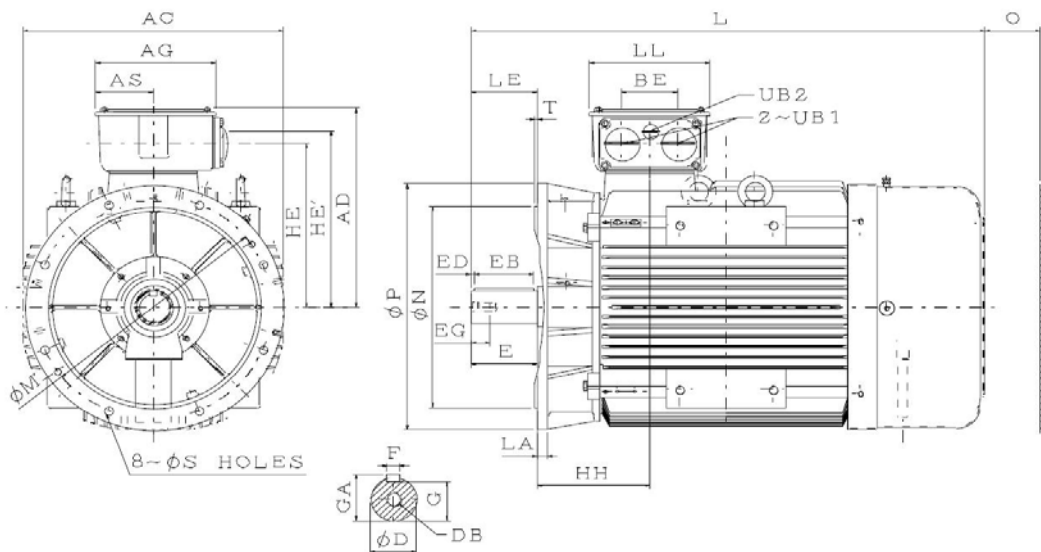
Outline drawing of cast iron design, flange version, mounting B5, frame size 160
